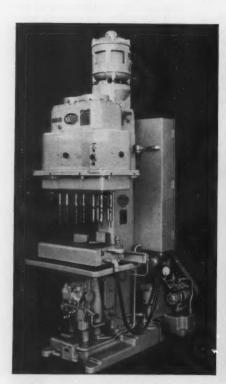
Multiple-spindle drilling and tapping machine for high-speed, sensitive operations
